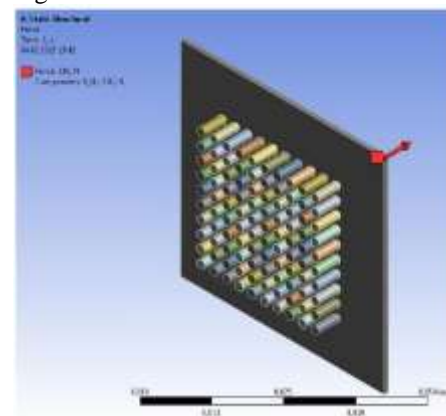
Edge Force acting on Workpiece for  $\varnothing 2$  mm Array Configuration
